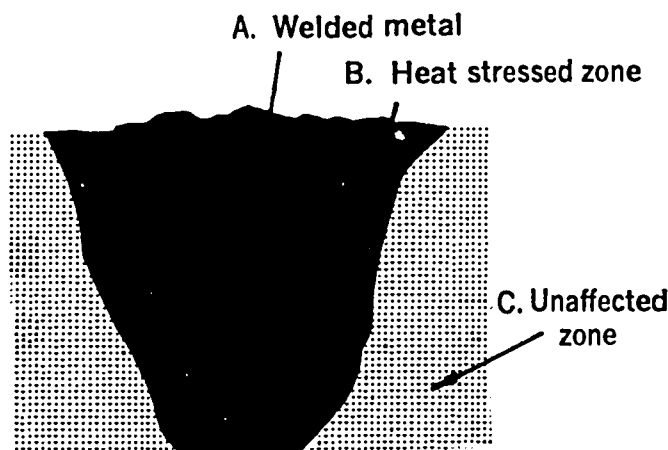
This sketch shows the welded joint (A), the narrow band of stress (B) produced by the welding process, and the rest of the fused assembly (C) not affected by the welding process.
